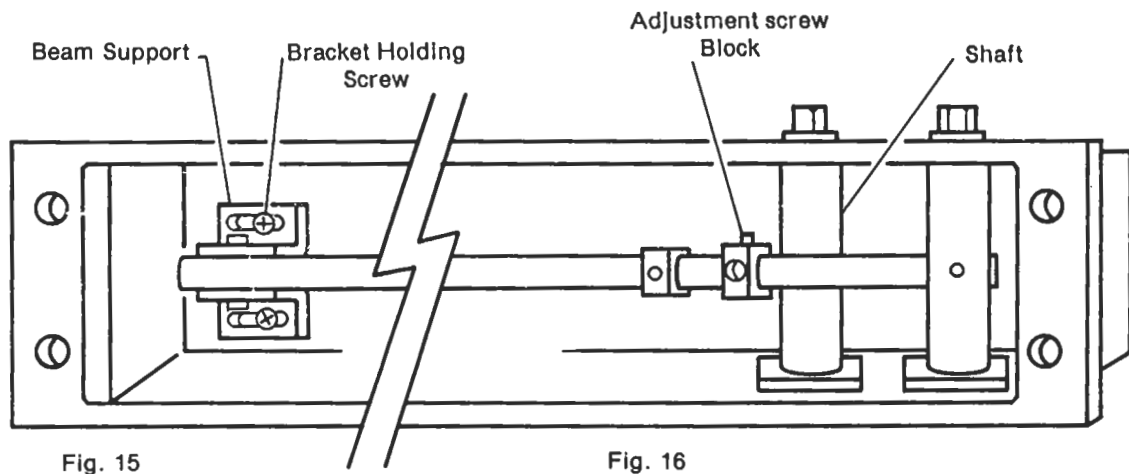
Calibration Adjustment of Single Range Tester or Lower Shaft Dual Range Testers.
